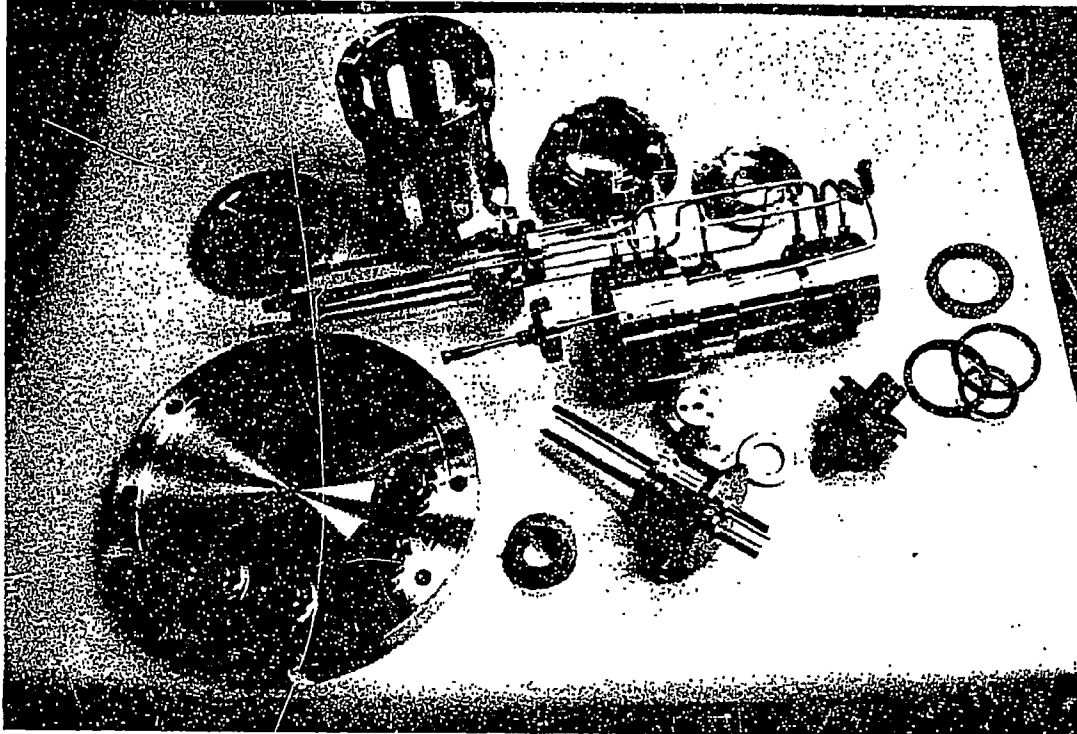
View of outer housing and bayonet mount. The housing was machined to minimize mass.
